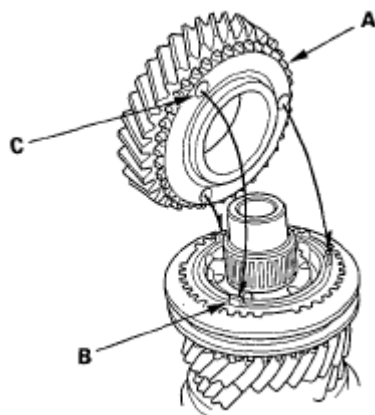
Identifying 4th Gear, Synchro Cone Fingers And 4th Gear
